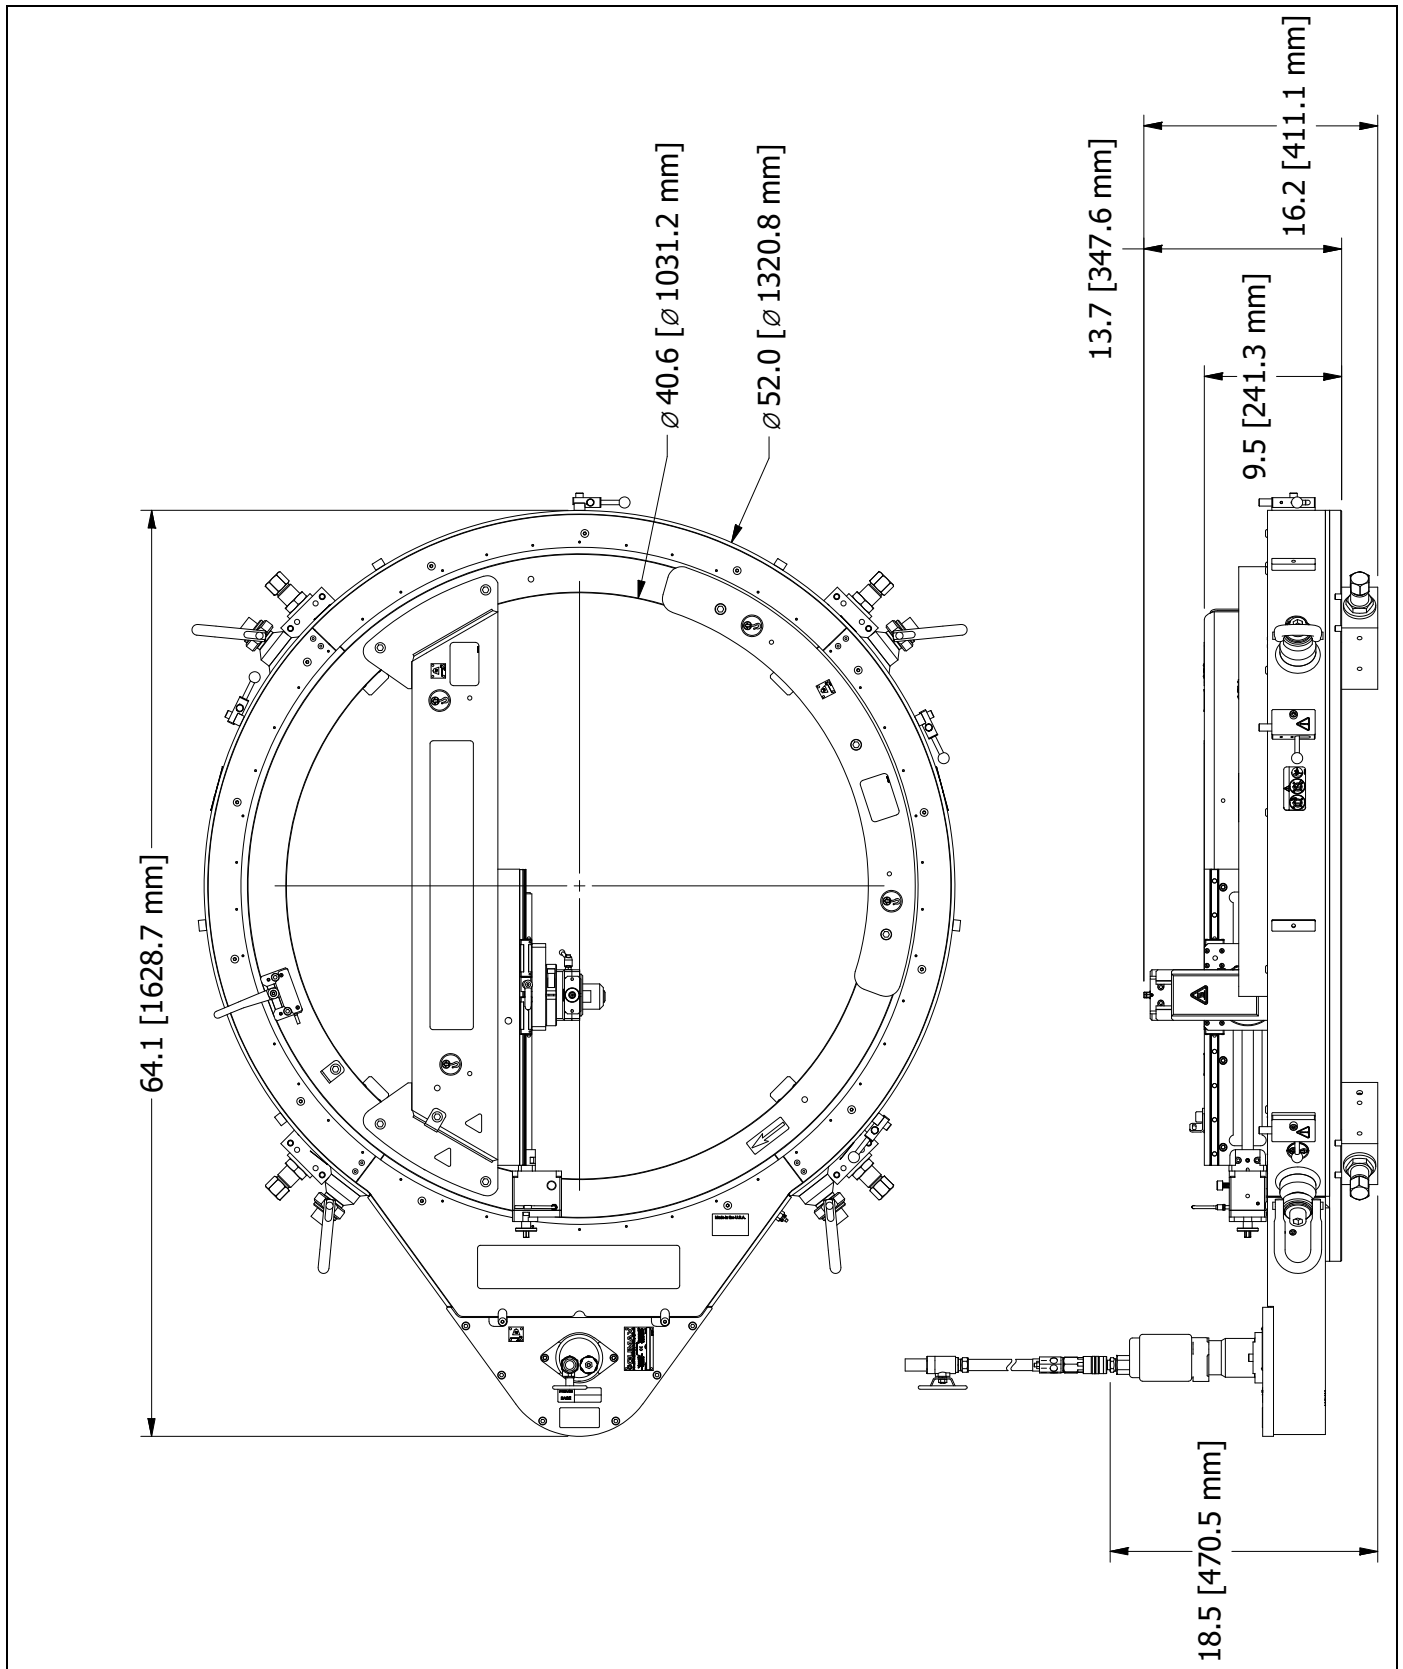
ODF40 SPEED FACER DIMENSIONS (P/N 86870)
